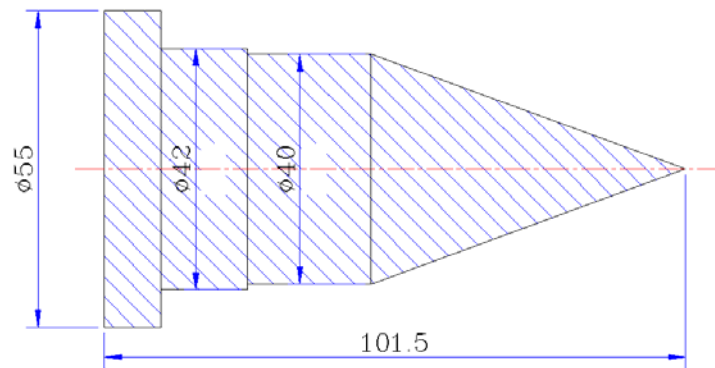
Two-dimensional drawing of outer nozzle (mm)
